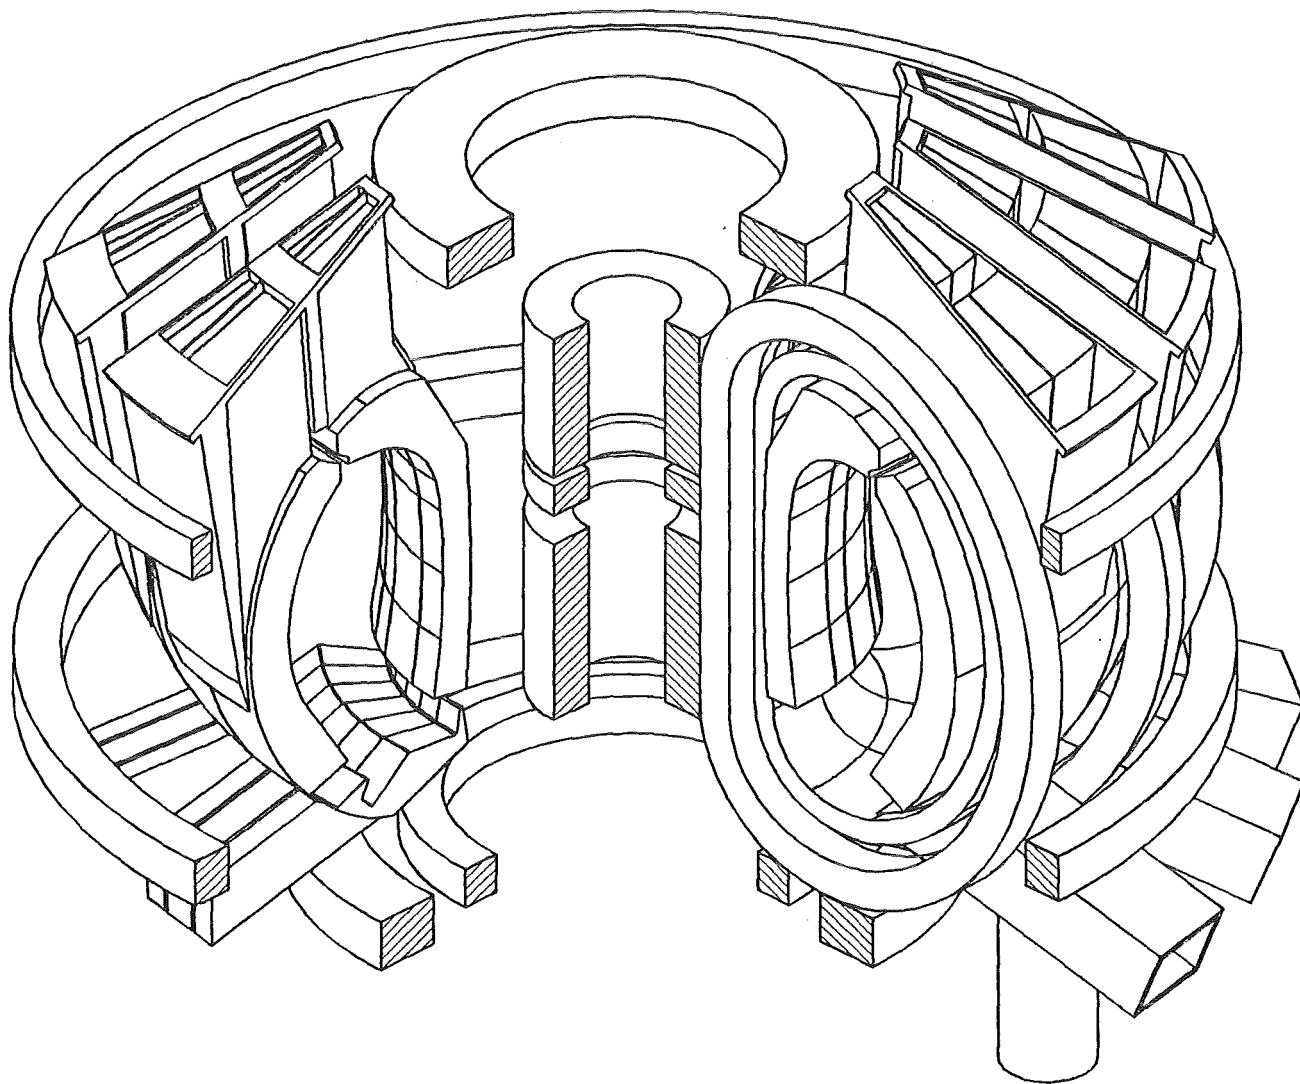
Toroidal assembly of the NET2A components: On the left-hand side, only blankets, divertors, and key plugs are shown, whereas on the right-hand side the blankets are mounted inside the vessel which is surrounded by the TF-coils.
